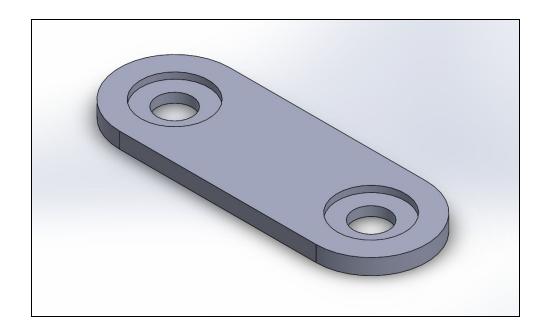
Fastener for holding background and weather sheet LEDs in place designed for 3D printer
